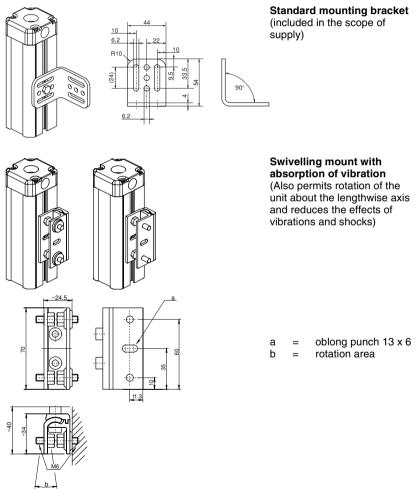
Mechanical mounting for SCAN-C measuring light curtain
